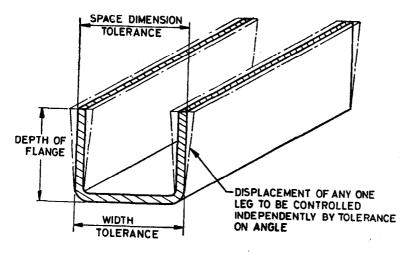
Tolerance on Space Dimensions of Regular Sections
